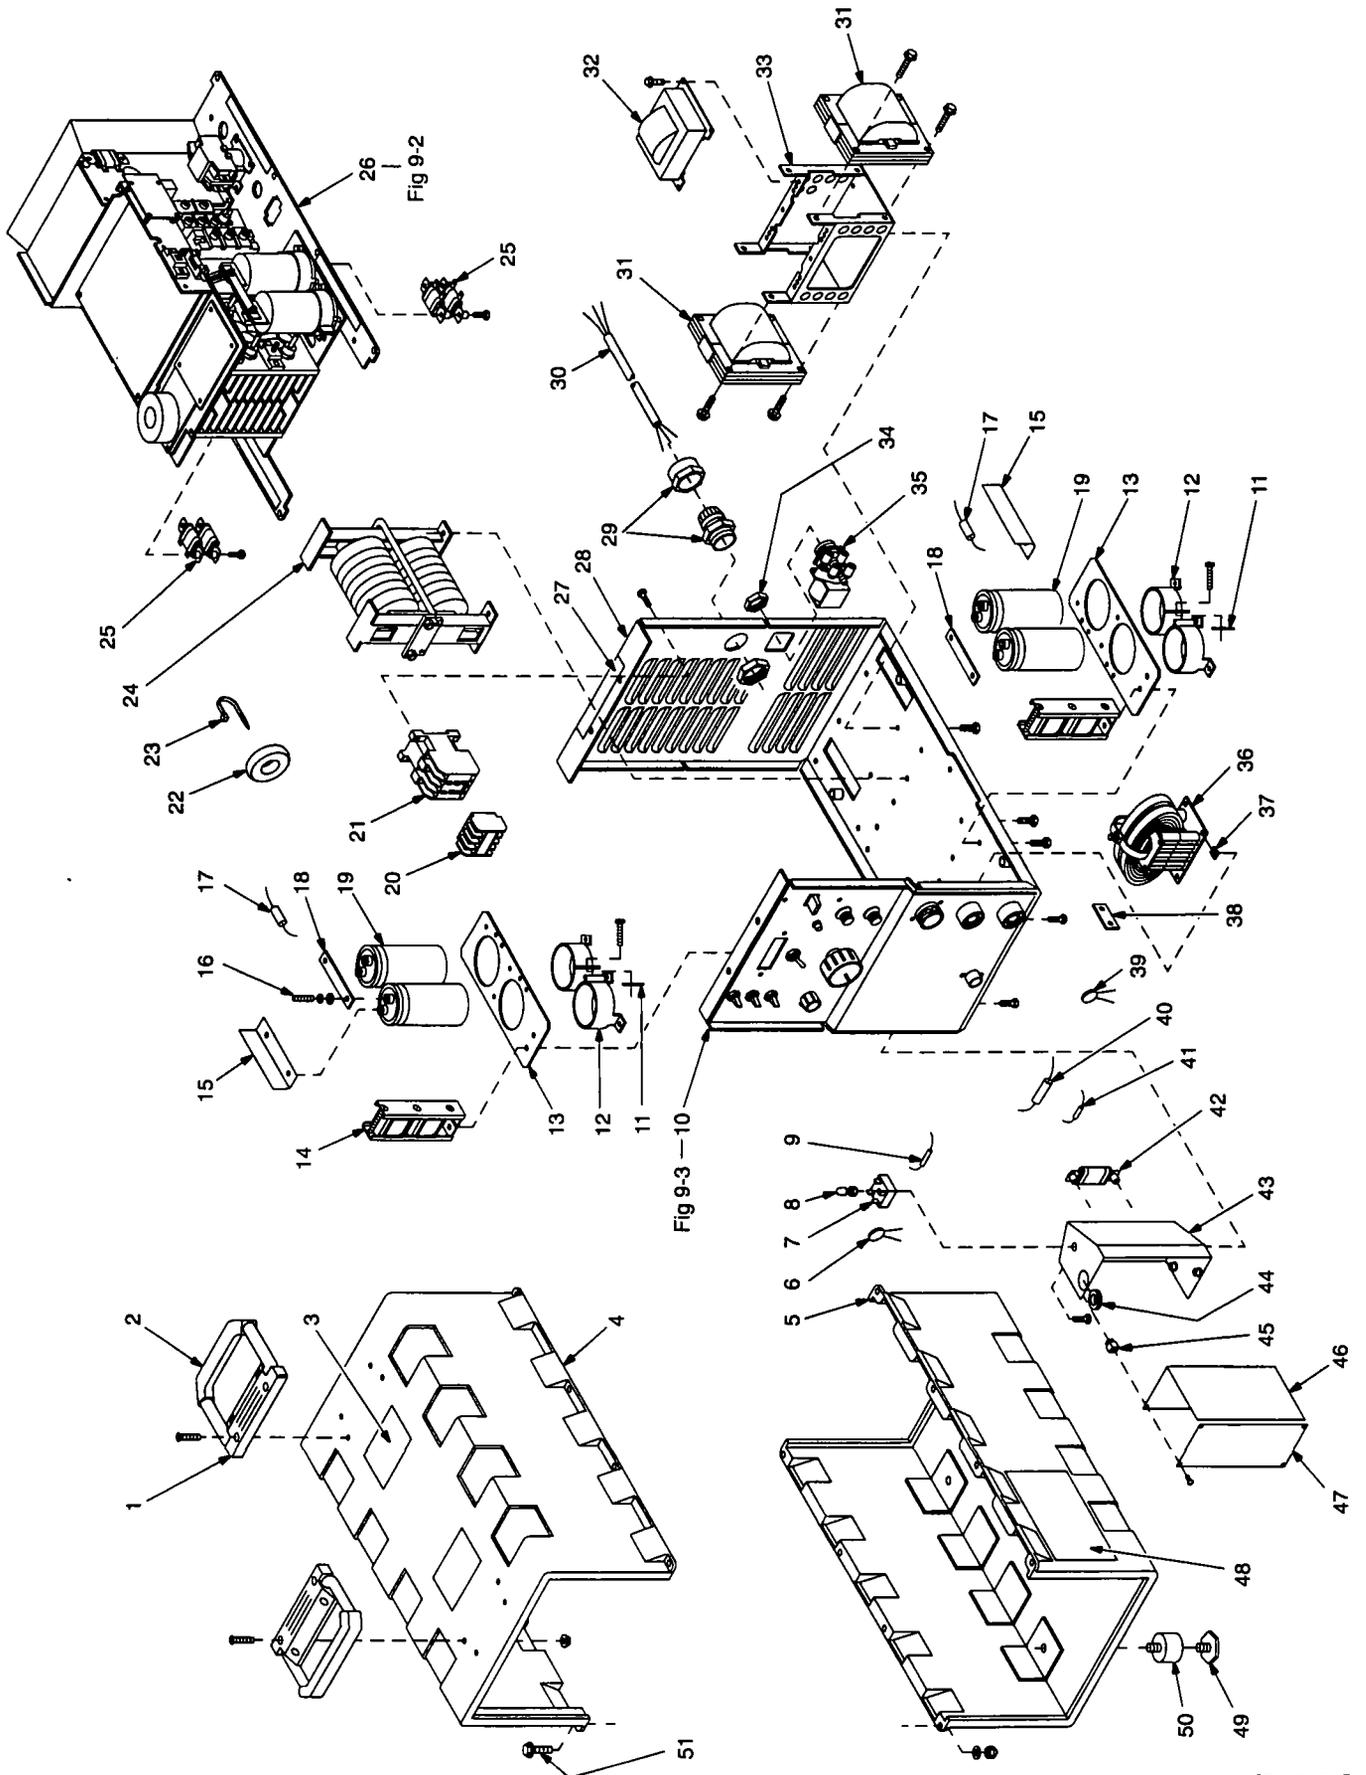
Main Assembly (208-230/460V Model Illustrated)
